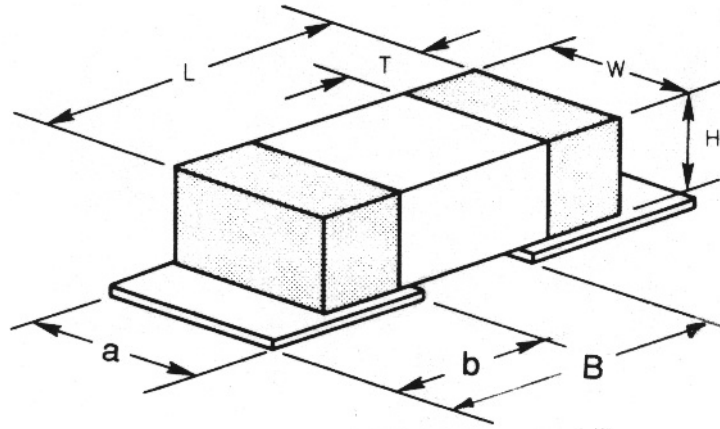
Additional dimensions of SMD component and solder lands.
